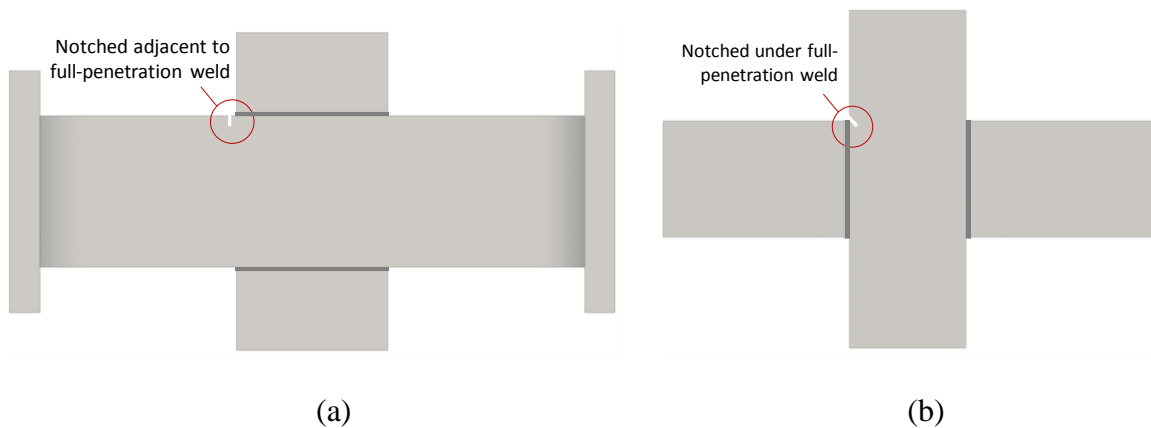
Notch location for (a) full-scale specimen and (b) half-scale specimen.
